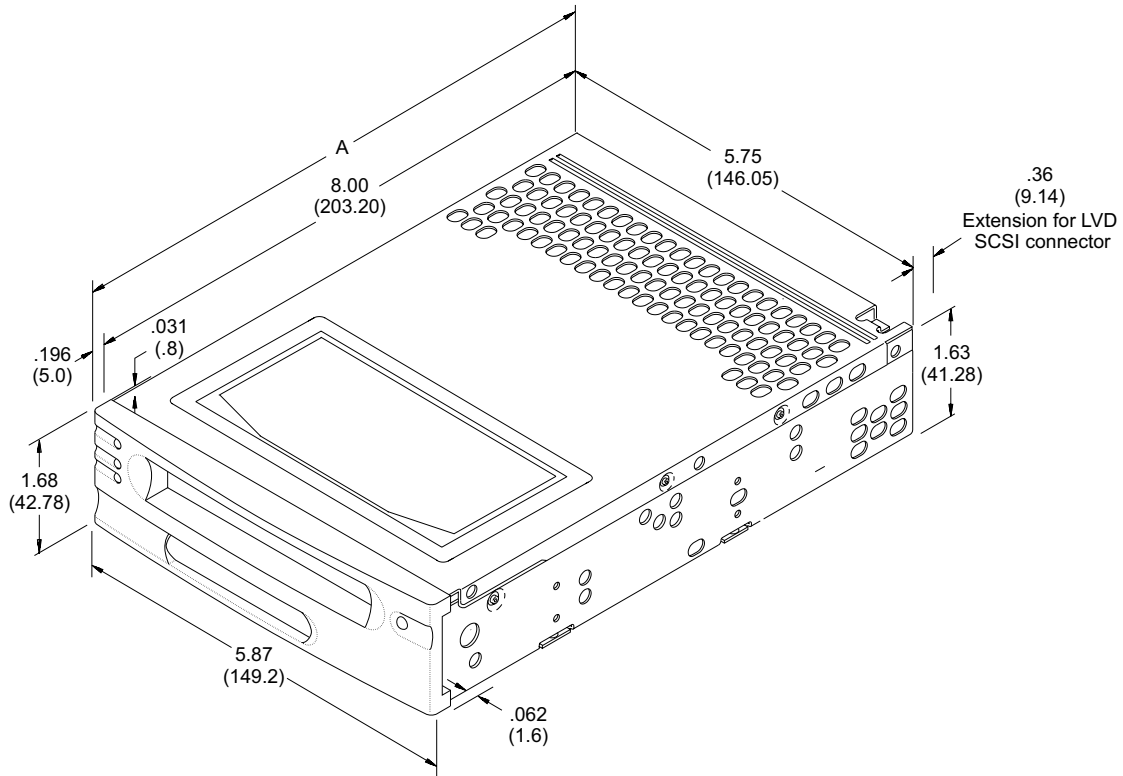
Dimensions of the bare drive in inches and millimeters (SCSI tape drive with an LCD faceplate shown)
